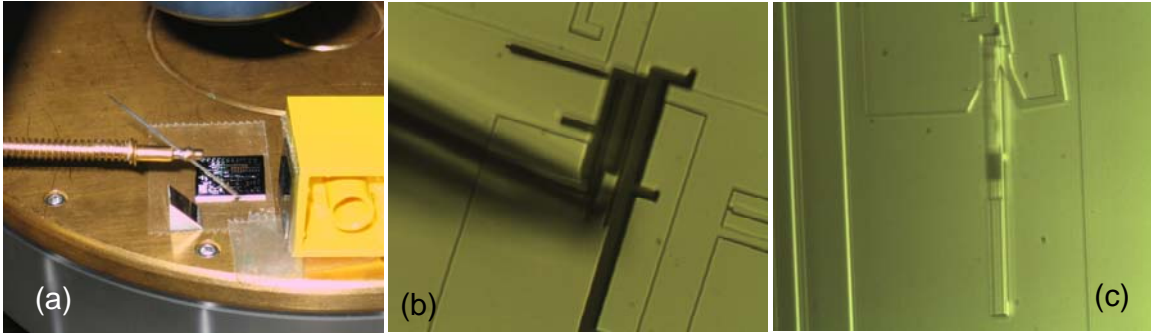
Assembly of Zyvex parts using dual-chip assembly techniques
